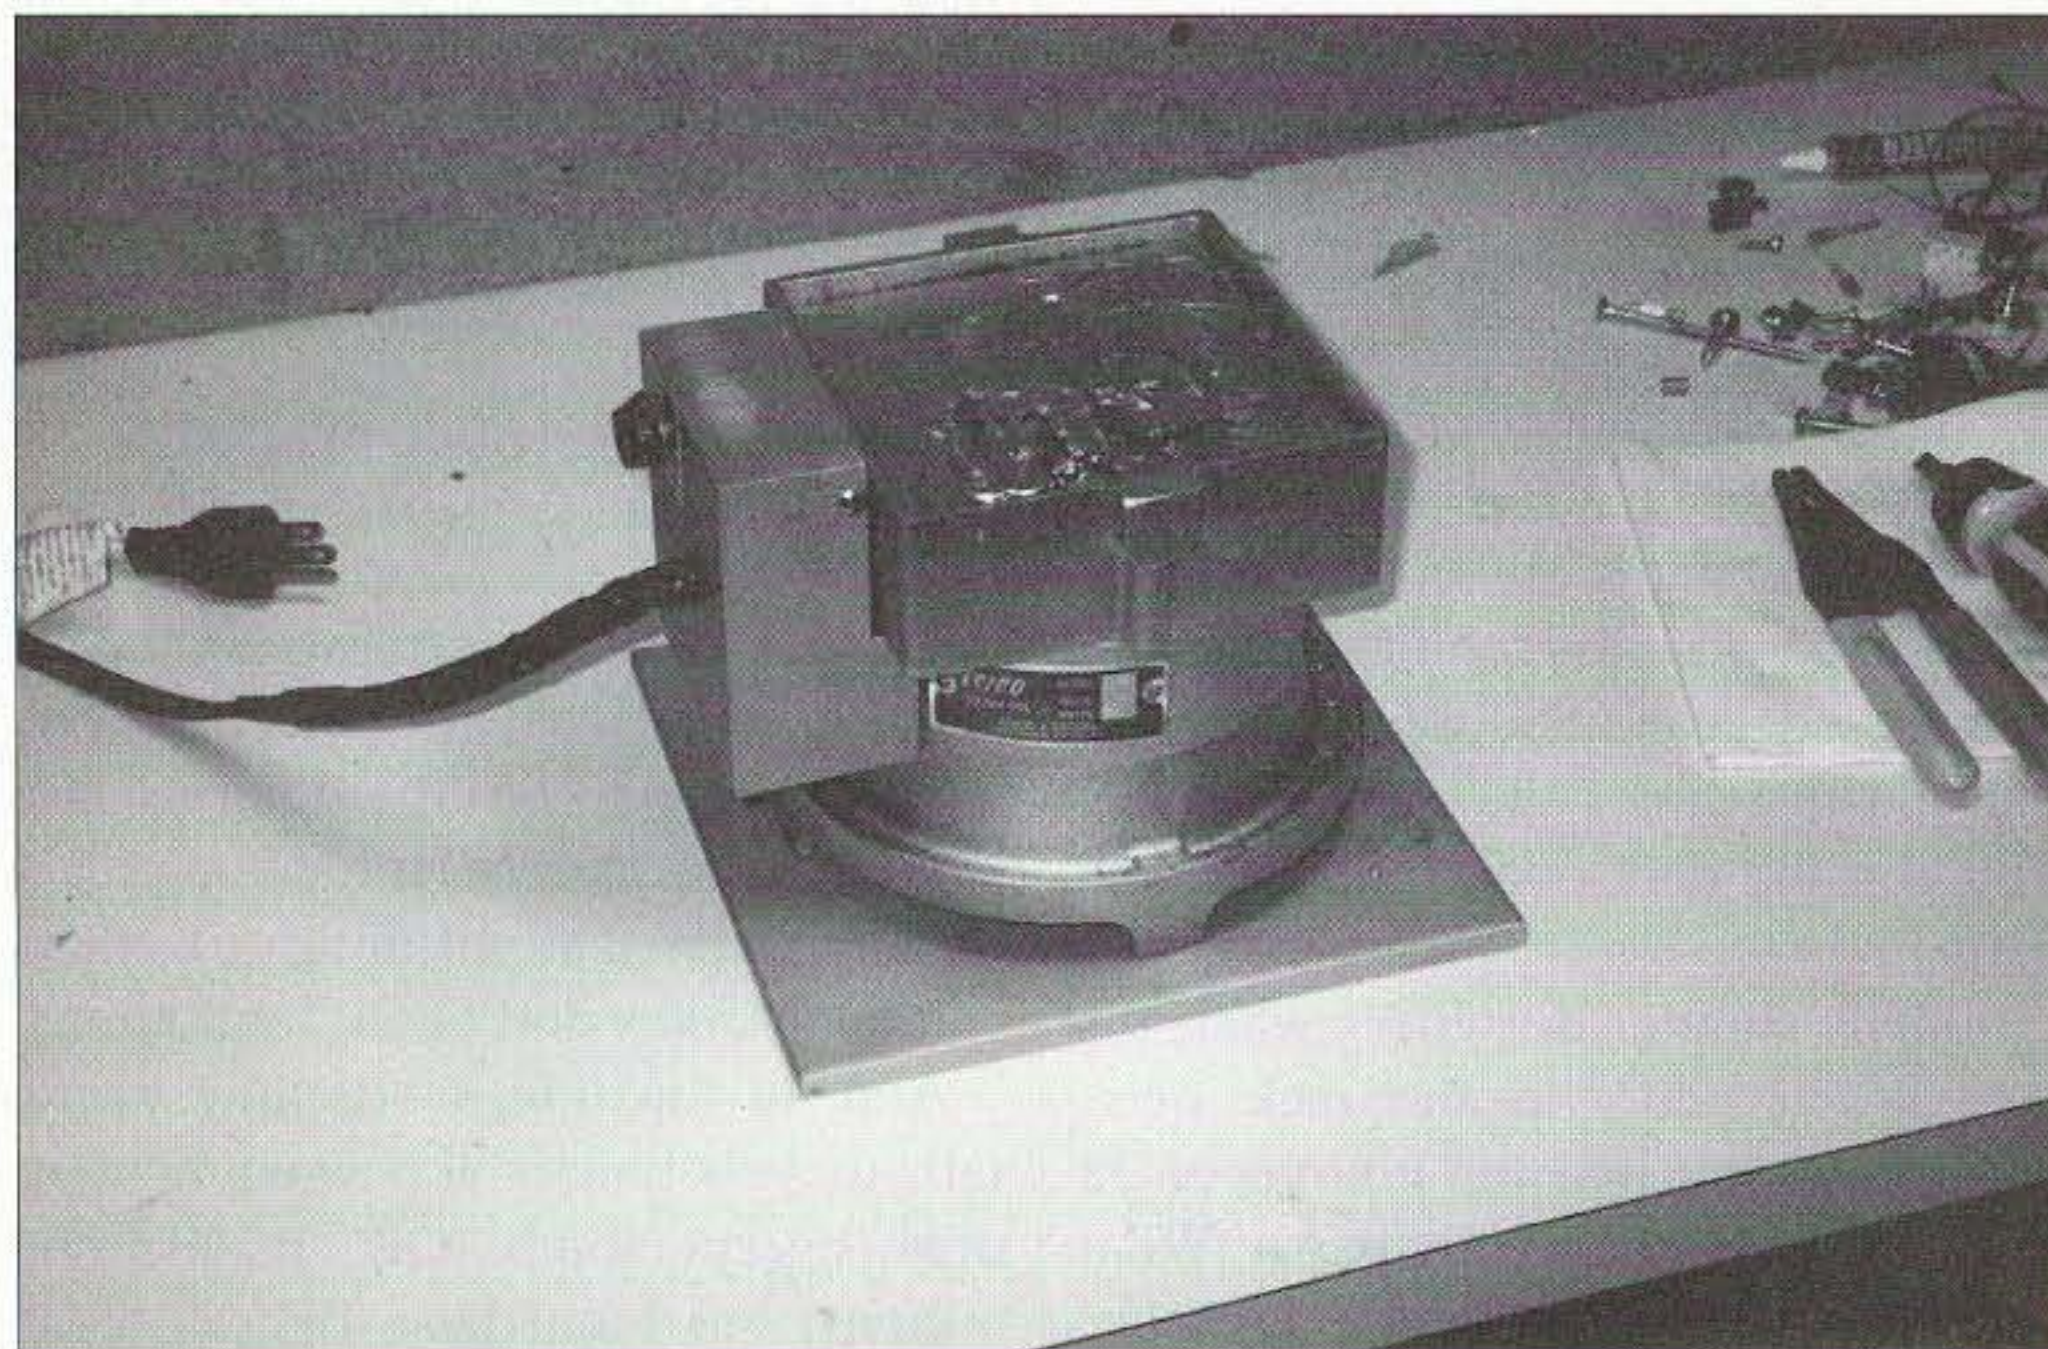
Photo A. Here's the solder pot getting ready for another job. Notice the ceramic tile on the table. This keeps the hot solder pot from burning the tabletop.
